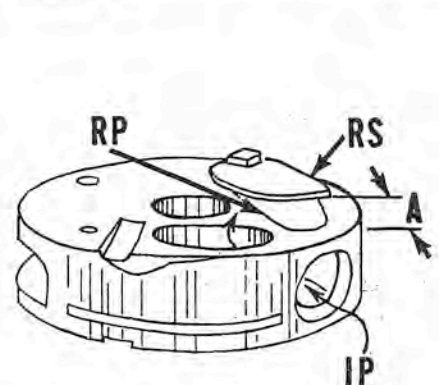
Center main bearing showing inlet reed valves. Refer to text for adjustment.
